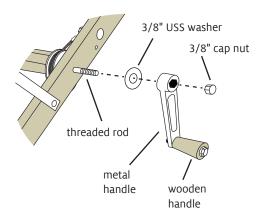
INSTALL WARP BEAM CRANK HANDLE
